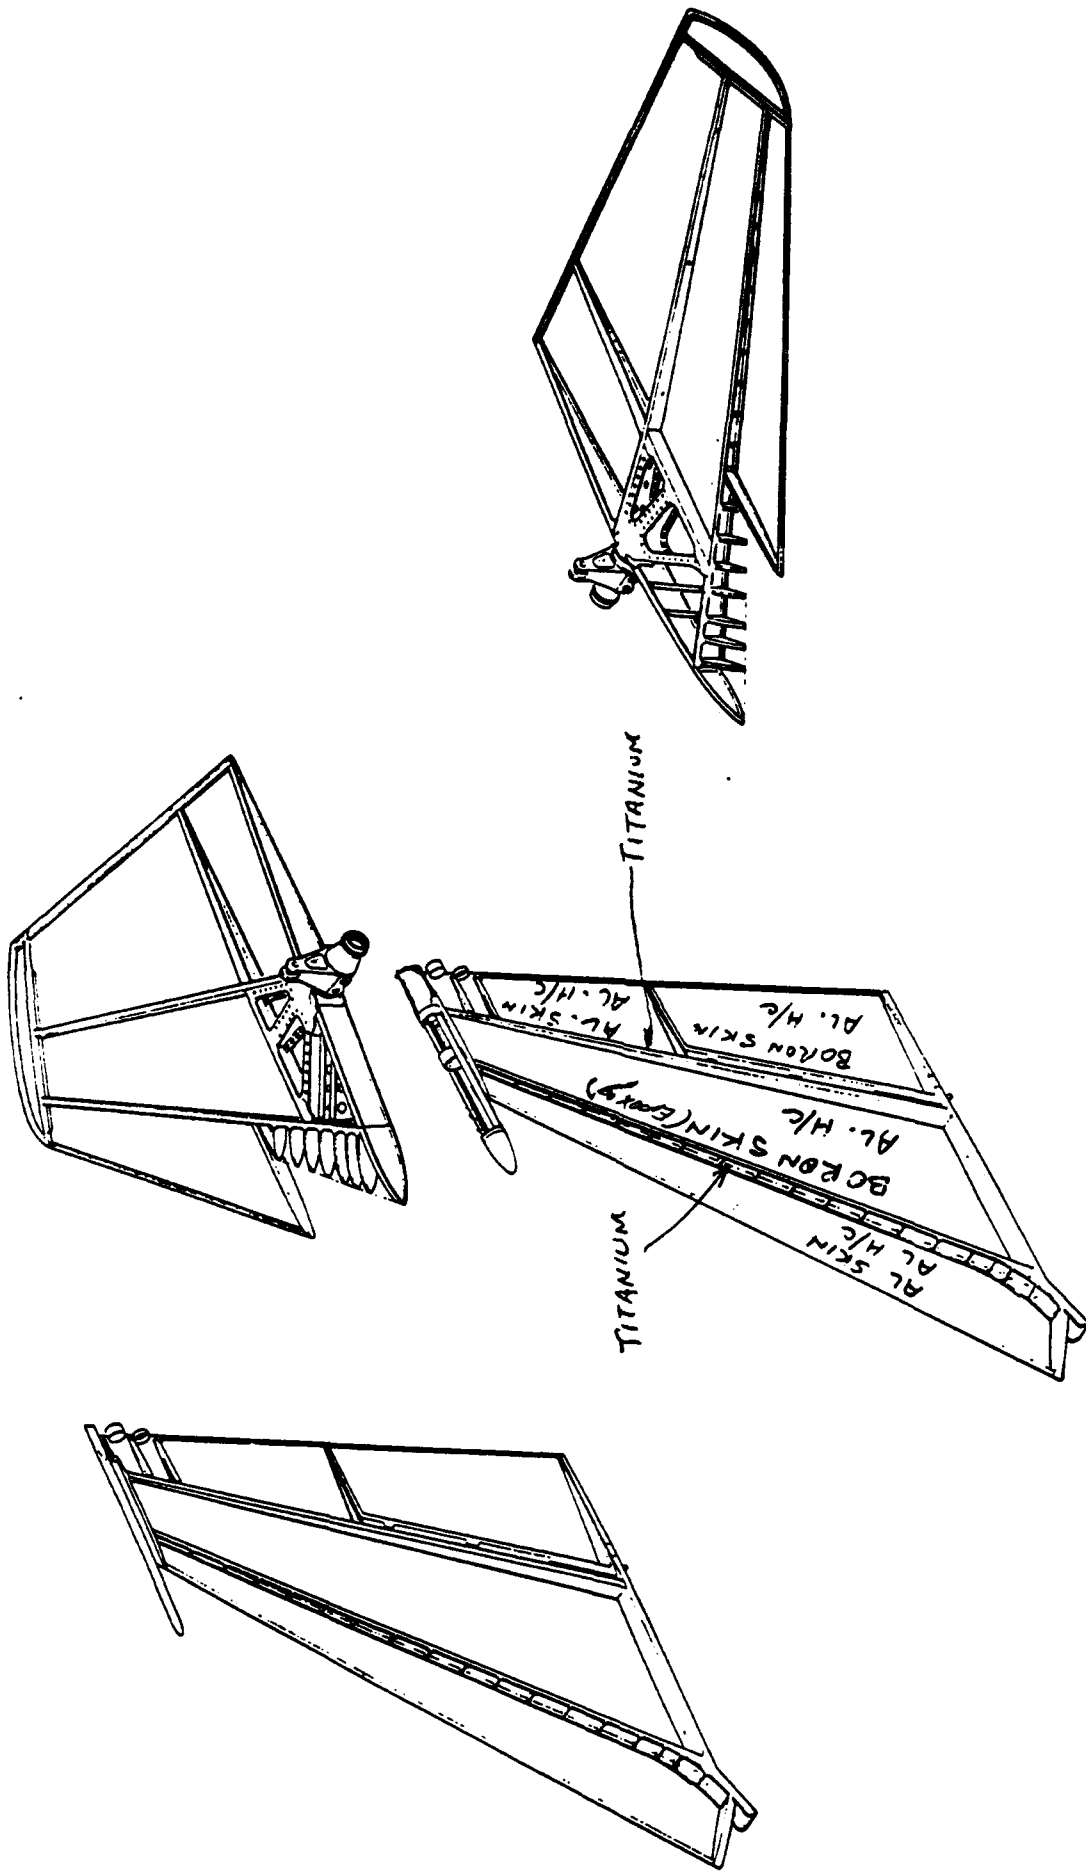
Exploded view of right- & left-hand F-15 fins and stabilators, with details of structural layout and fin materials.
